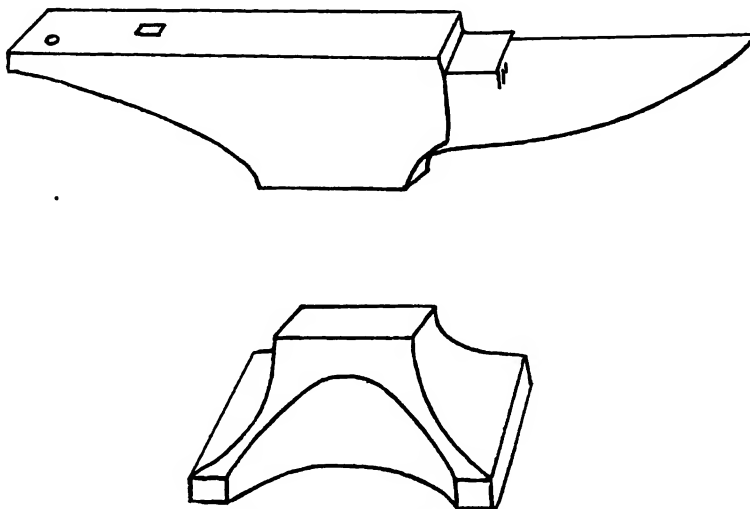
THE TWO PIECES ARE THEN WELDED AT THE WAIST
